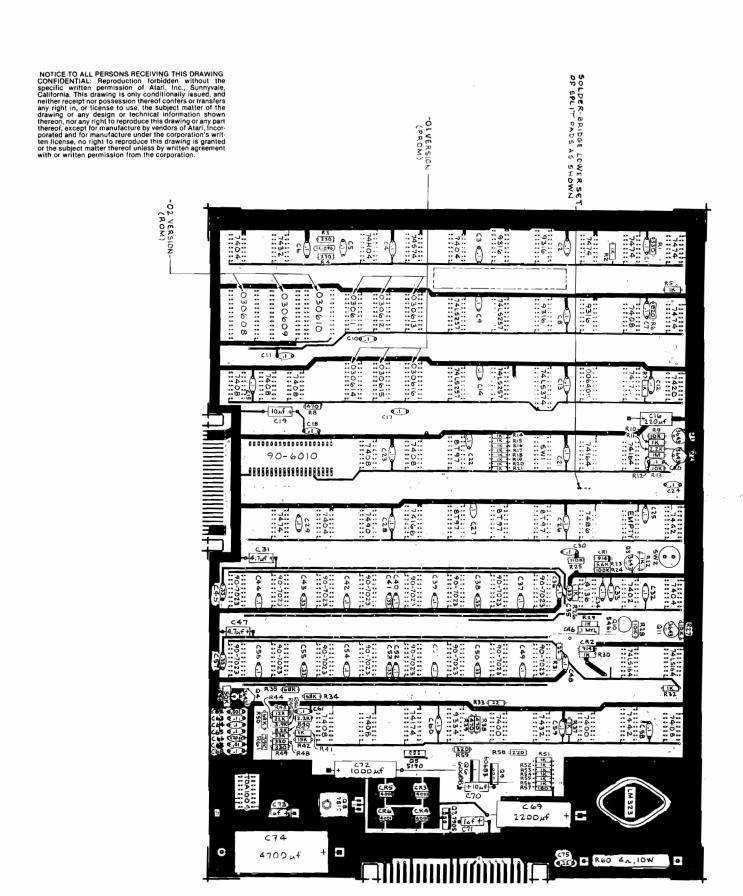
Avalanche PCB Assembly A030572-01 A
